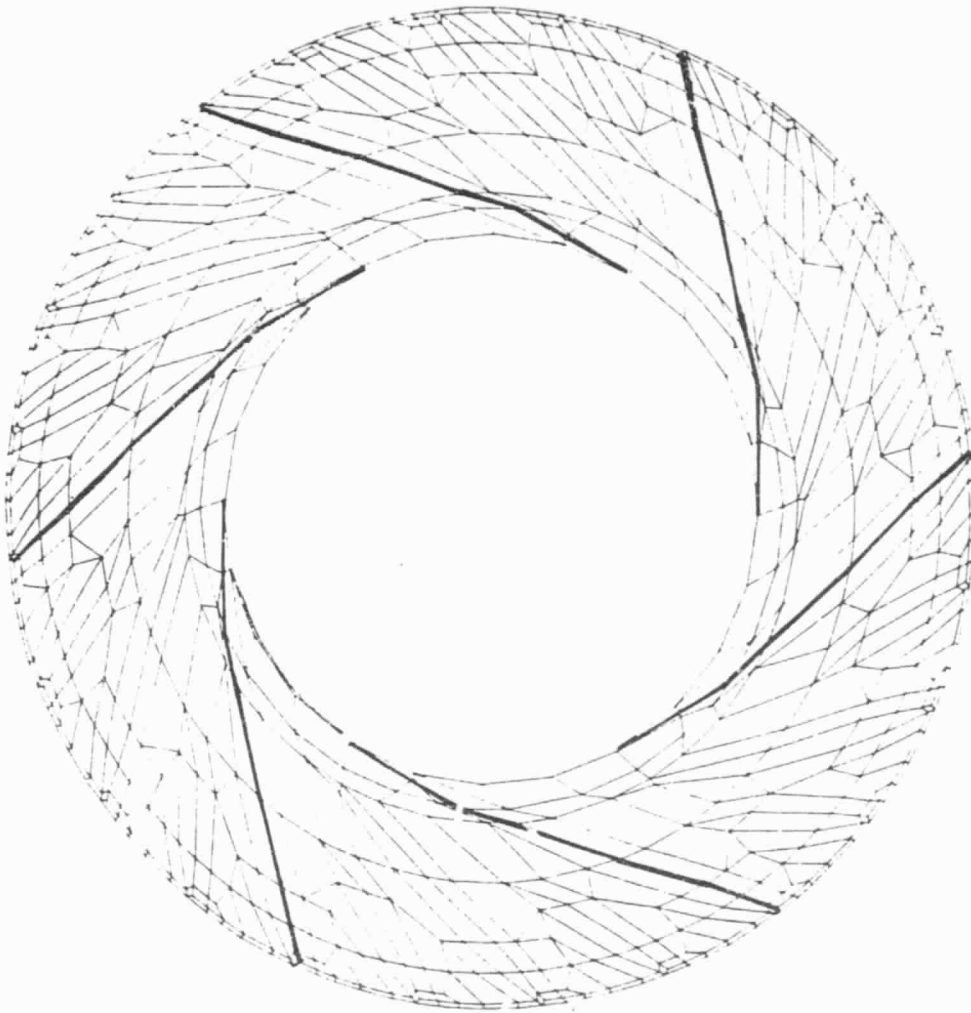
Schematic of Segment Assembly (Shroud Only)
